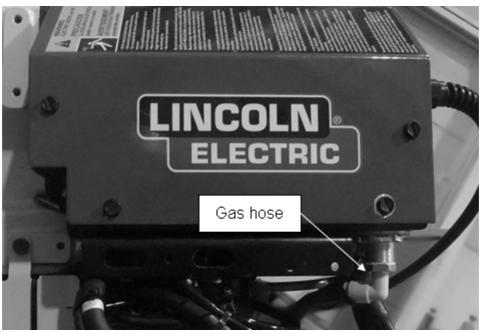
(c) Replacing the wire feeder Auto drive 4R100 (3/3)
